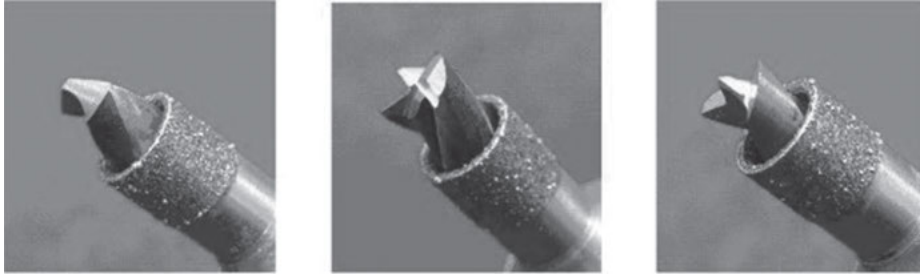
Different step-core drills: (a) step-core-twist drill, (b) step-core-saw drill and (c) step-core-candlestick drill [43].
